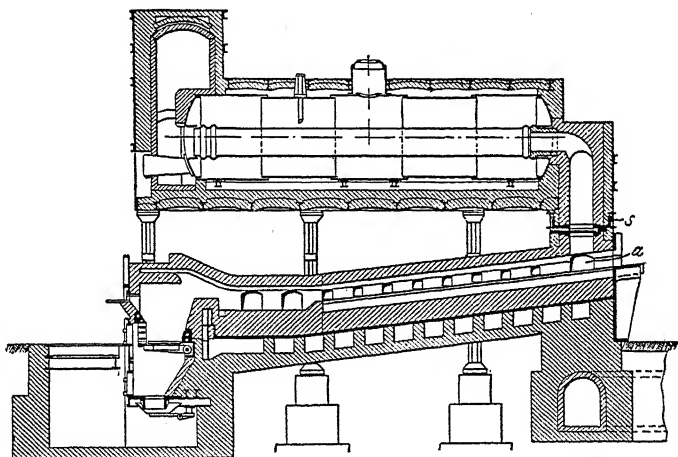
SECTION THROUGH FURNACE AND OVERHEAD FLAME-TUBE BOILER OF THE GERMAN FURNACE-BUILDING CO., DÜSSELDORF.
